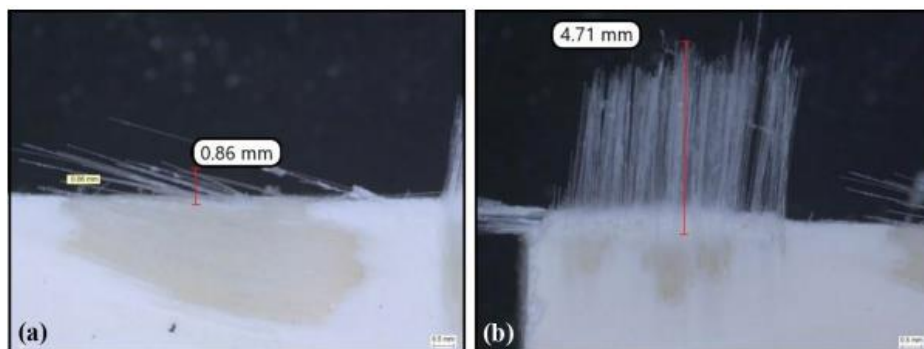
Microscopic view of fiber fuzzing and delamination after milling of glass fiber reinforced composites: (a) Type I fuzzing; (b) Type II fuzzing.
